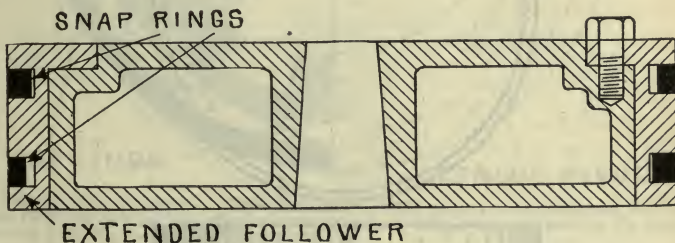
Snap rings fitted to extended follower. This permits removal of rings without taking out the piston.
